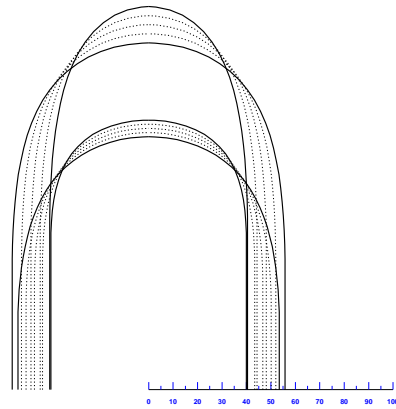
Polygons for end-spacer machining with 5 axis milling machine for dipole model magnet. These polygons are transferred into commercial CAM packages for the calculation of the cutter paths for the milling of the spacer from glass-epoxy tubes.
